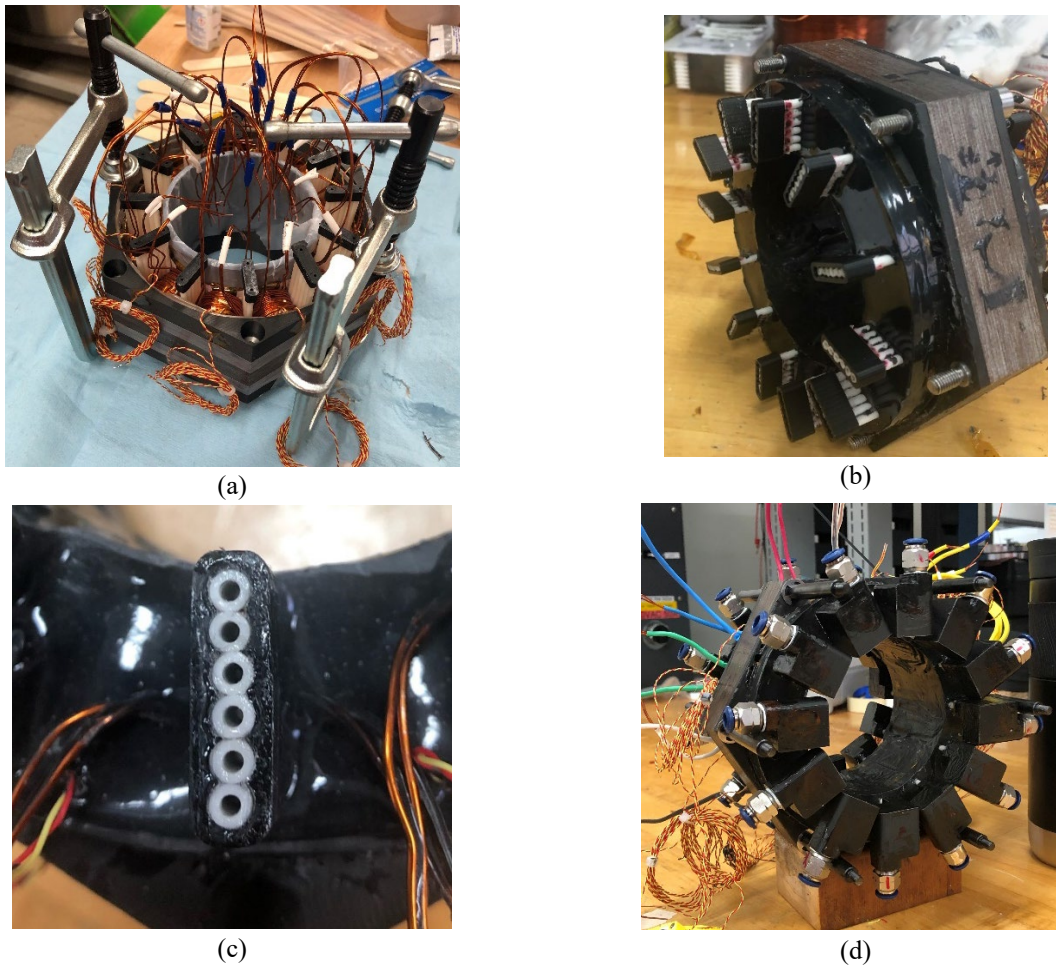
Cooling assembly fabrication steps: (a) alumina tubing insertion into the stator and potting assembly fixturing; (b) post cure potting result; (c) endpiece 1 (EP1) attached to end of alumina tubes; and (d) final stator assembly with cooling endpiece 2 (EP2) and quick disconnects installed.
